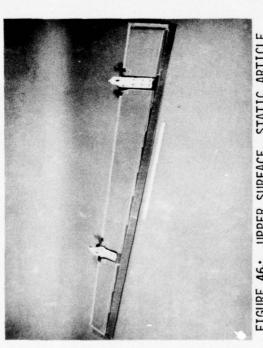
UPPER SURFACE, STATIC ARTICLE NO. 1, SPOILER ASSEMBLY
